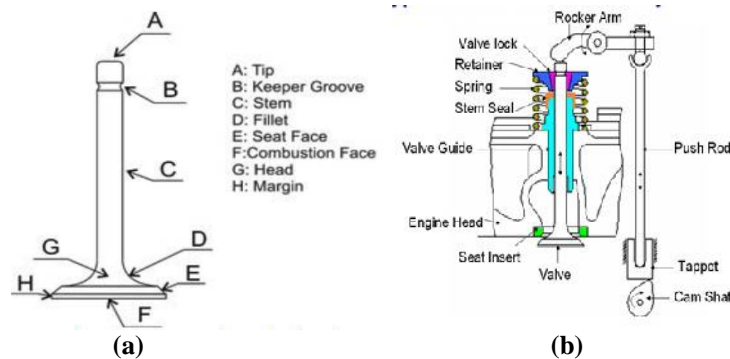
(a) Descriptive view of engine valve, (b) Assembly of engine valve
